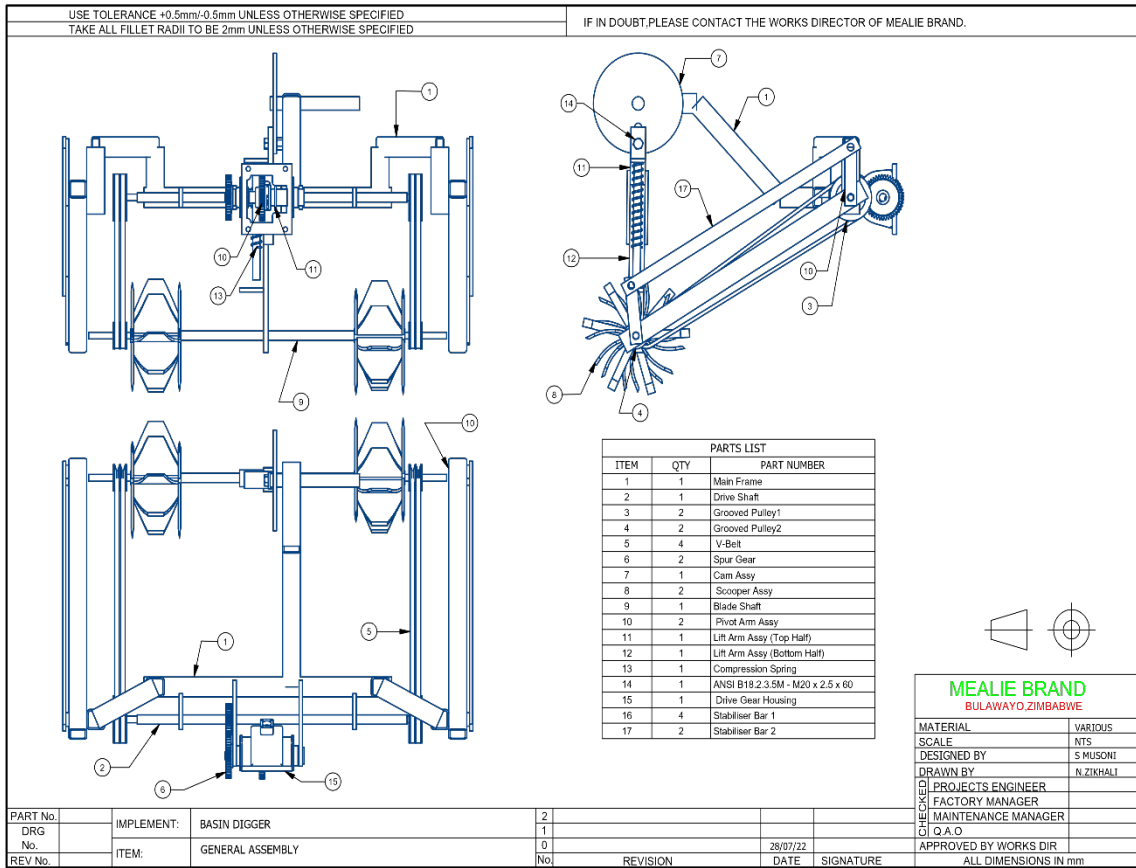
CAD model of Basin Digger Prototype 1 (two-wheel tractor operated)
